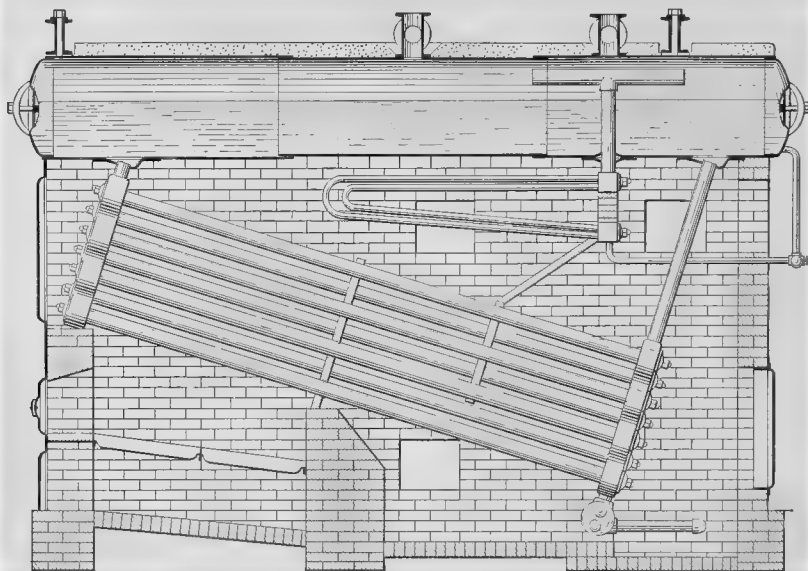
Longitudinal section of Babcock & Wilcox boiler and superheater.
